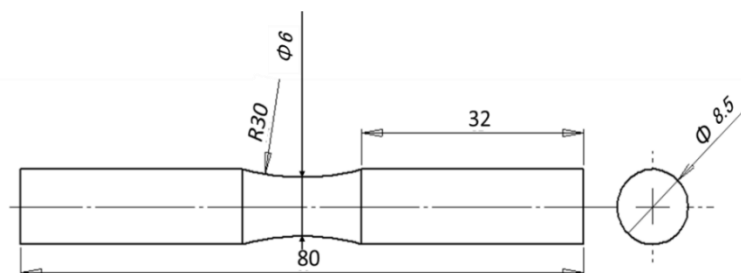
Geometry of the specimen for fatigue test (in mm).
